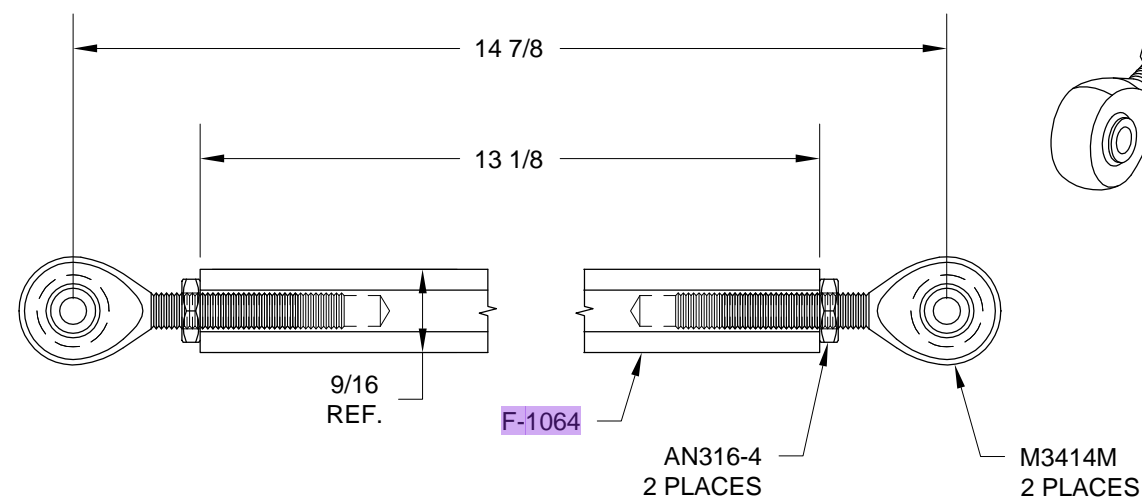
ASSEMBLING THE AILERON PUSHROD
